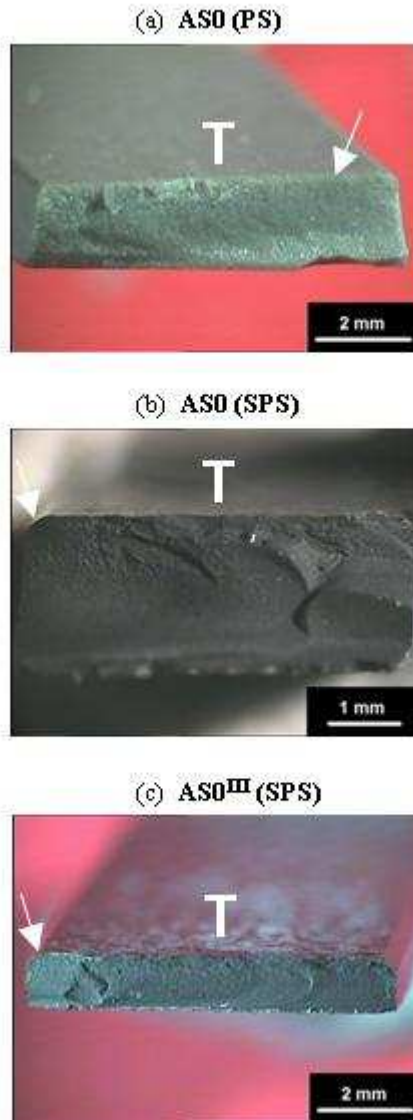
Fracture surfaces of homogeneous alumina samples. Typical fracture surface of ceramic materials with fracture mirror (indicated by arrow) in correspondence of the tensile surface (T) is observable.
